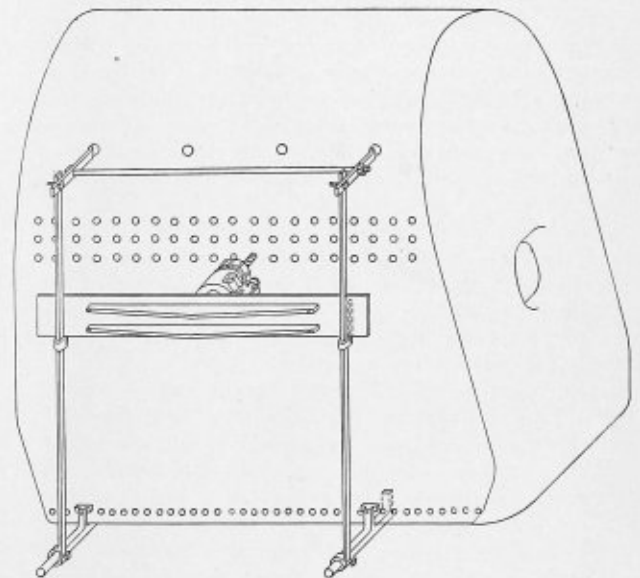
AIR MOTOR SUPPORT FOR DRILLING TELLTALE HOLES
